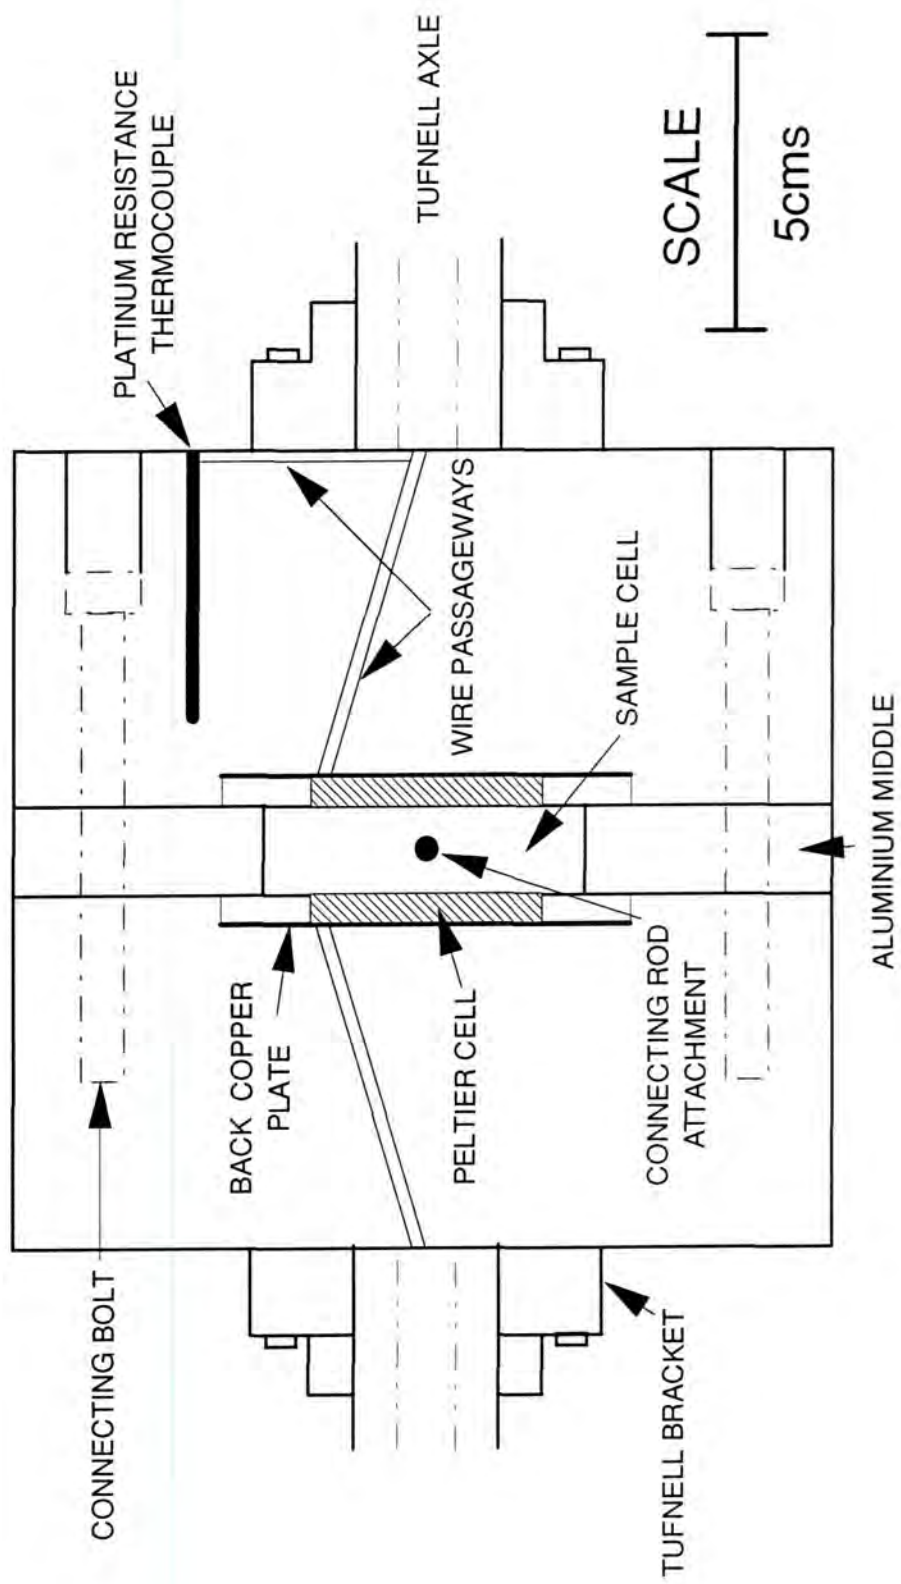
Polymer Blend Calorimeter - Central Heat Sink Section
